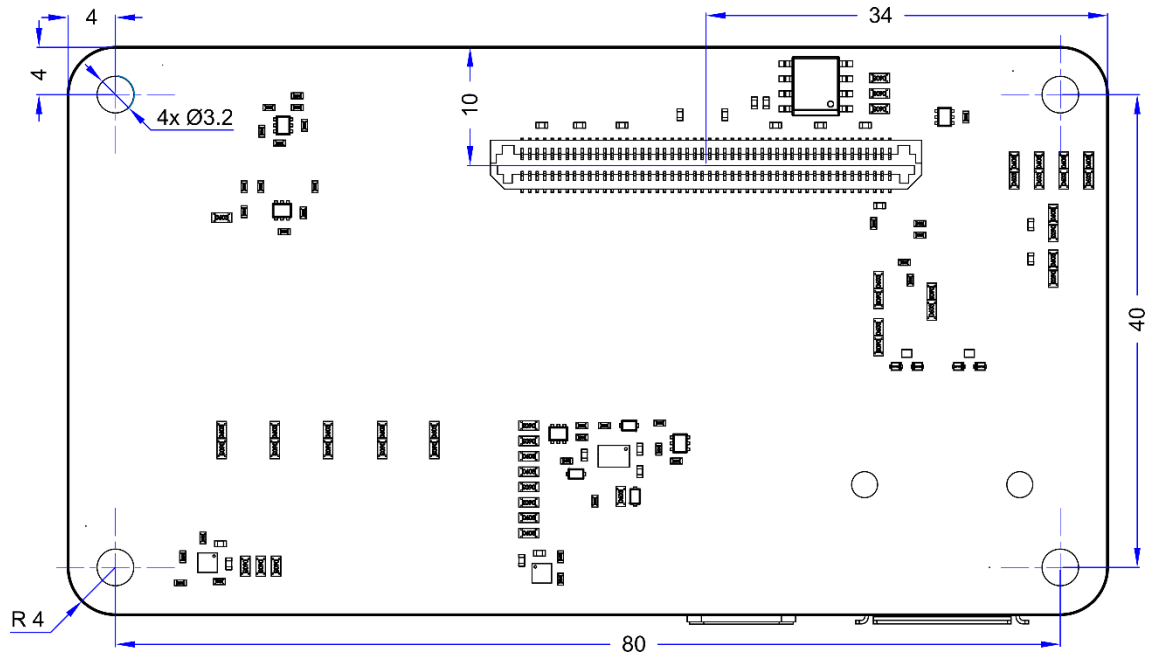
Verdin iMX8M Plus Mezzanine – mechanical dimensions in mm (bottom side bottom view)
